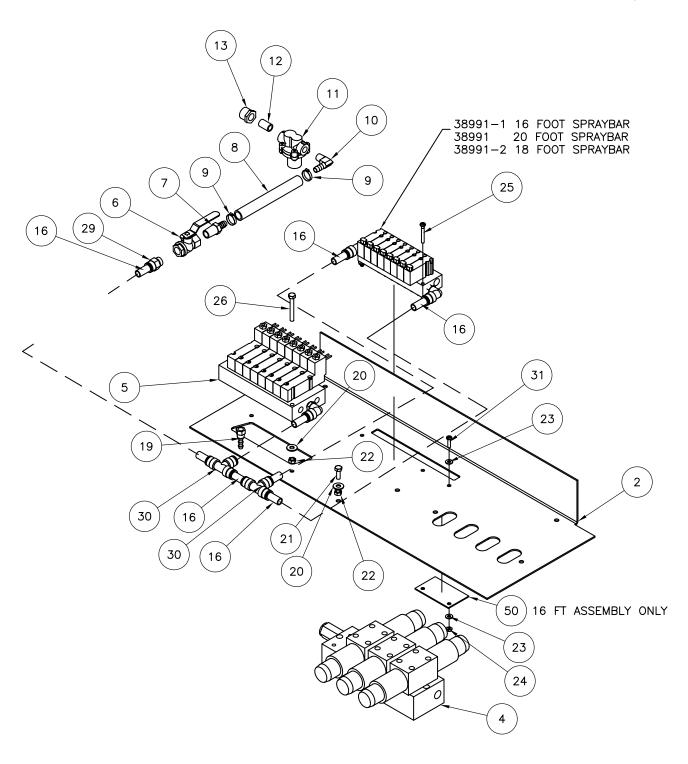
VALVE BOX, SUBASSEMBLY
